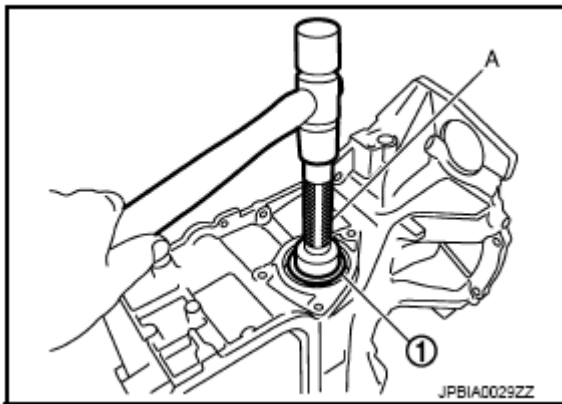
Installing Axle Pipe To Oil Pan Using Drift
